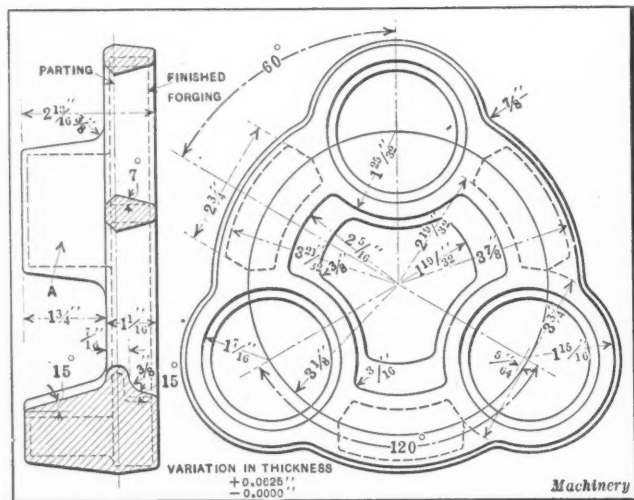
Forge-size Drawing with Draft, Finish, and Shrinkage Allowances
